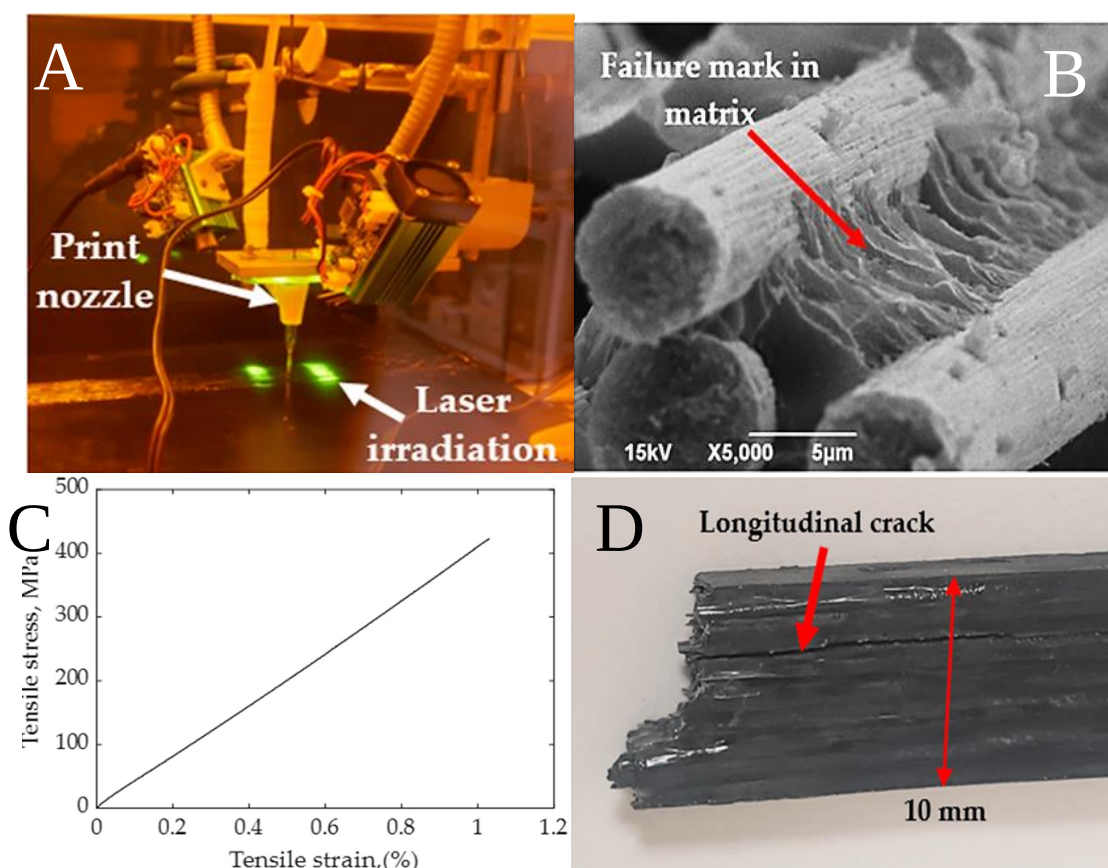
(A) Light assisted three dimensional printing set up of carbon fiber reinforced thermoset composites, real-life picture; (B) scanning electron microscopy images of fracture surfaces tested under tensile load with fiber pull out and failure marks; (C) representative tensile test curve for continuous carbon fiber reinforced three dimensional printed thermoset composite; (D) fractured specimen [44].
